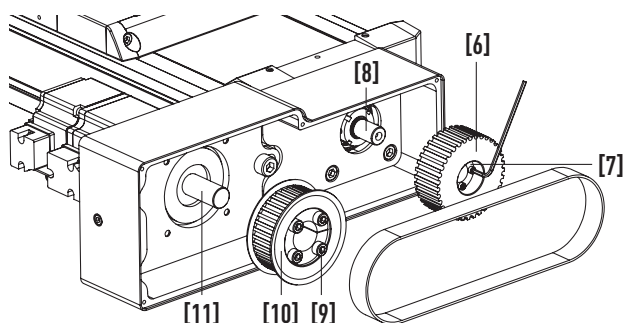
Mounting the motor flange, clamping bolt, and motor
